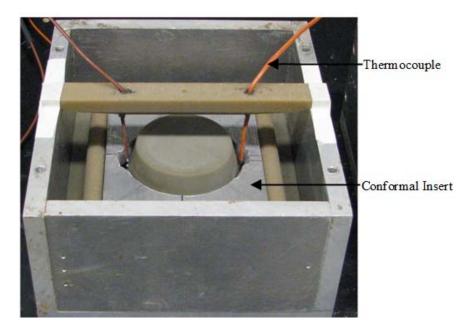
Complete Assembly with Thermocouples for Epoxy casting
